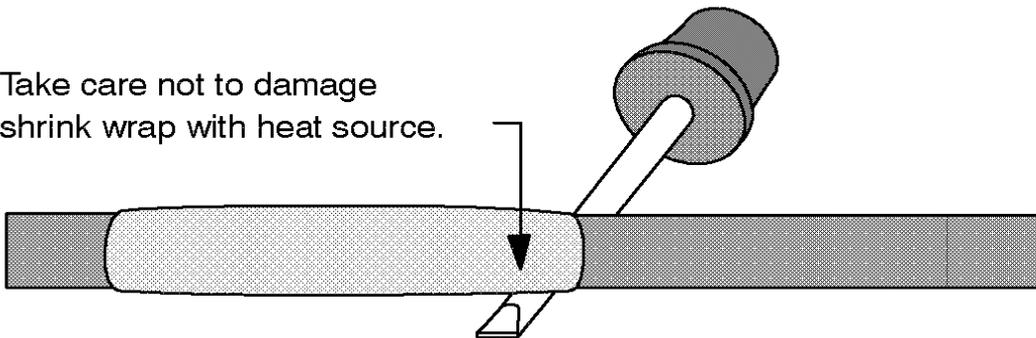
Slide shrink tubing over solder joint. Apply heat near shrink tube. DO NOT place direct heat to shrink tube as it will become damaged.
